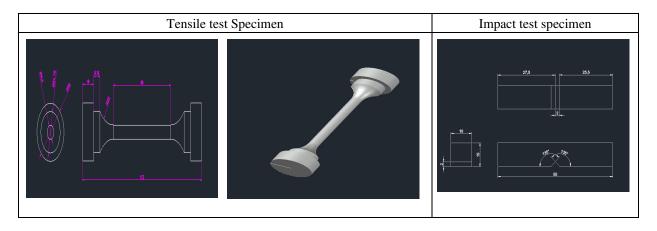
Shows 2D and 3D drawing for tensile test specimen.
